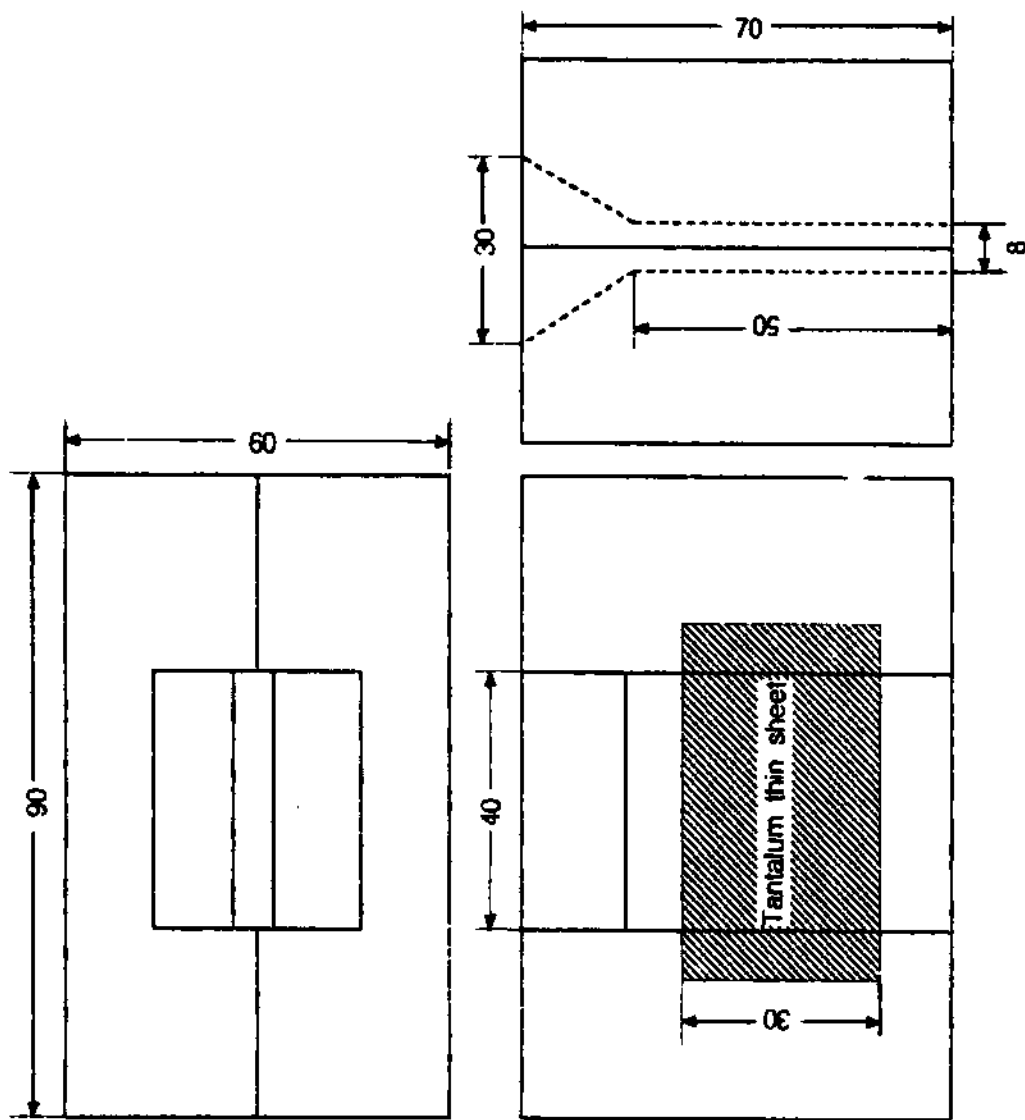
Schematic drawing of metal mold for cast-bonding.
